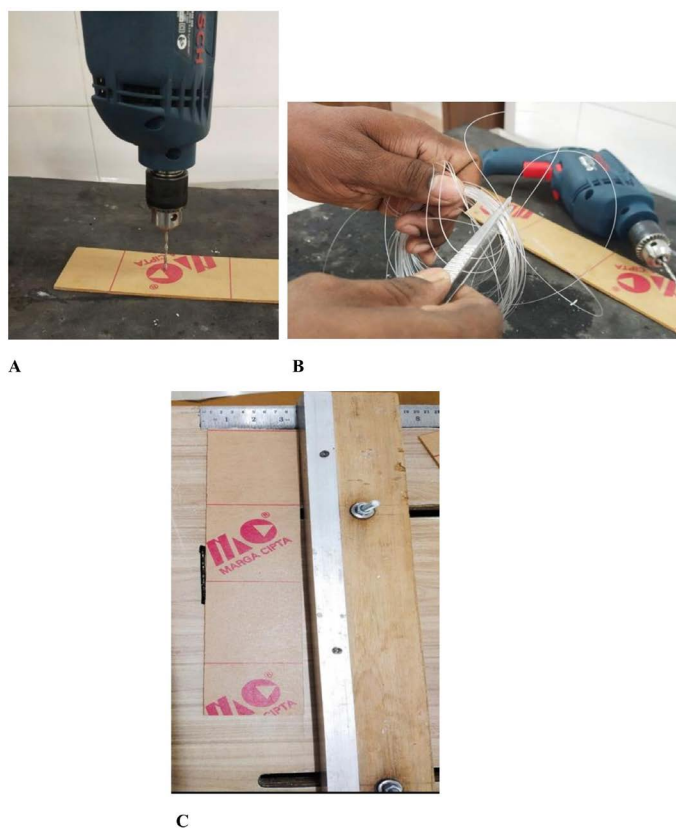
A. Making hole in the center sheet with a driller. B. Nylon thread for tying the specimens. C. Table saw.
